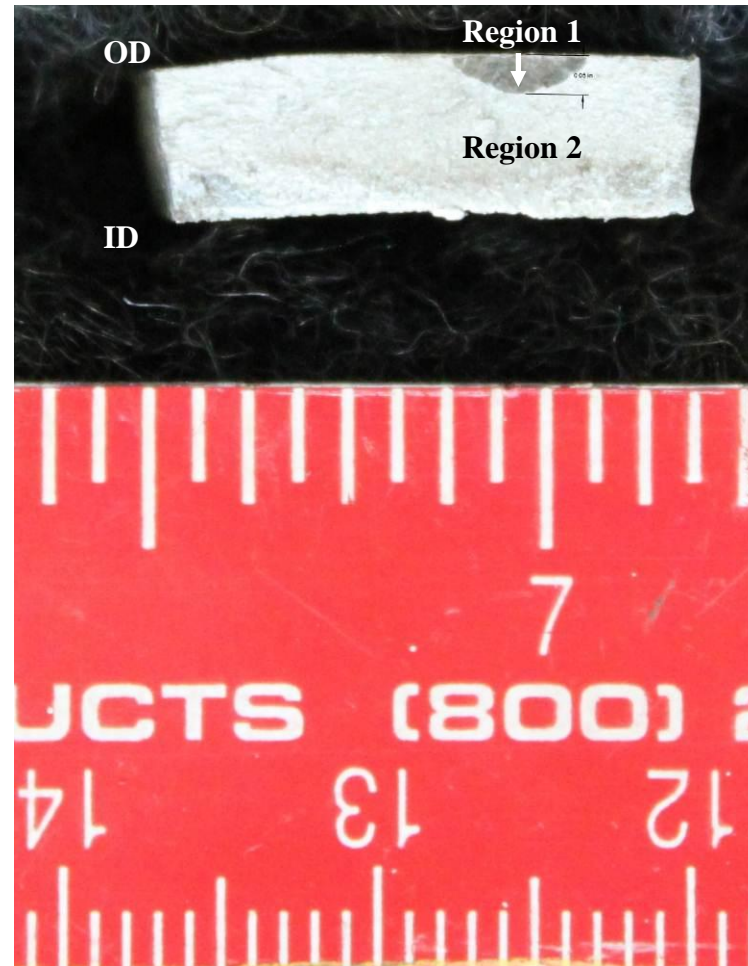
Photograph of the fracture surface from Crack Colony 9B.
